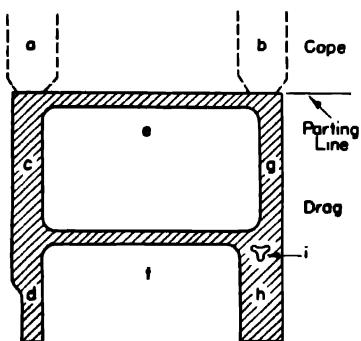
Cross section of casting showing the formation of a shrinkage cavity. Sections *e* and *f*, being thin, solidify quickly and are easily fed by the headers on each side. The heavy section, *h*, being below the lighter section, *g*, and separated by *g* from the riser, cannot be fed effectively, and consequently shrinkage cavity *i* is produced. Design of these sections as at *c* and *d* would eliminate this effect.
